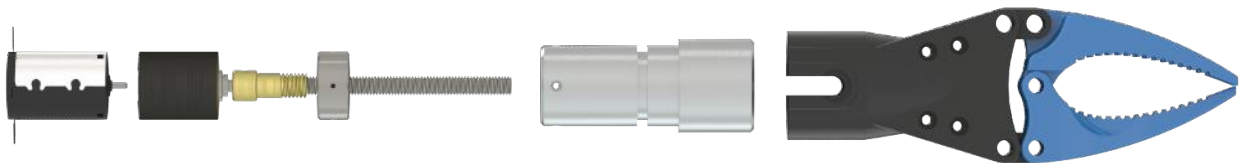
Overview of the gripper mechanism: (from left to right) electric motor, gearing, spindle with bearing, bearing housing with piston rod, exchangeable end effector
